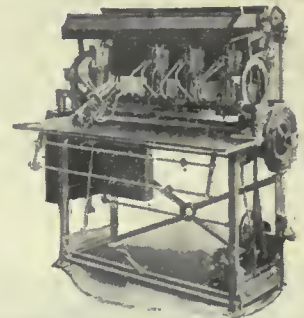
REAR VIEW OF MACHINE SHOWING ACCESSIBILITY OF LAMPS.
